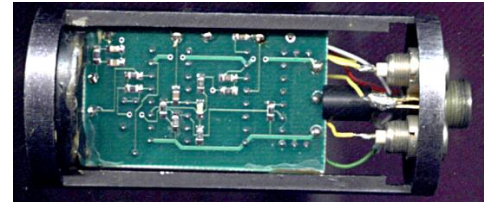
Laboratory sample of the detector package, board is installed in the coaxial holder. The SPAD detection chip is on the left, the SPAD chip is located in the left cylindrical holder.
